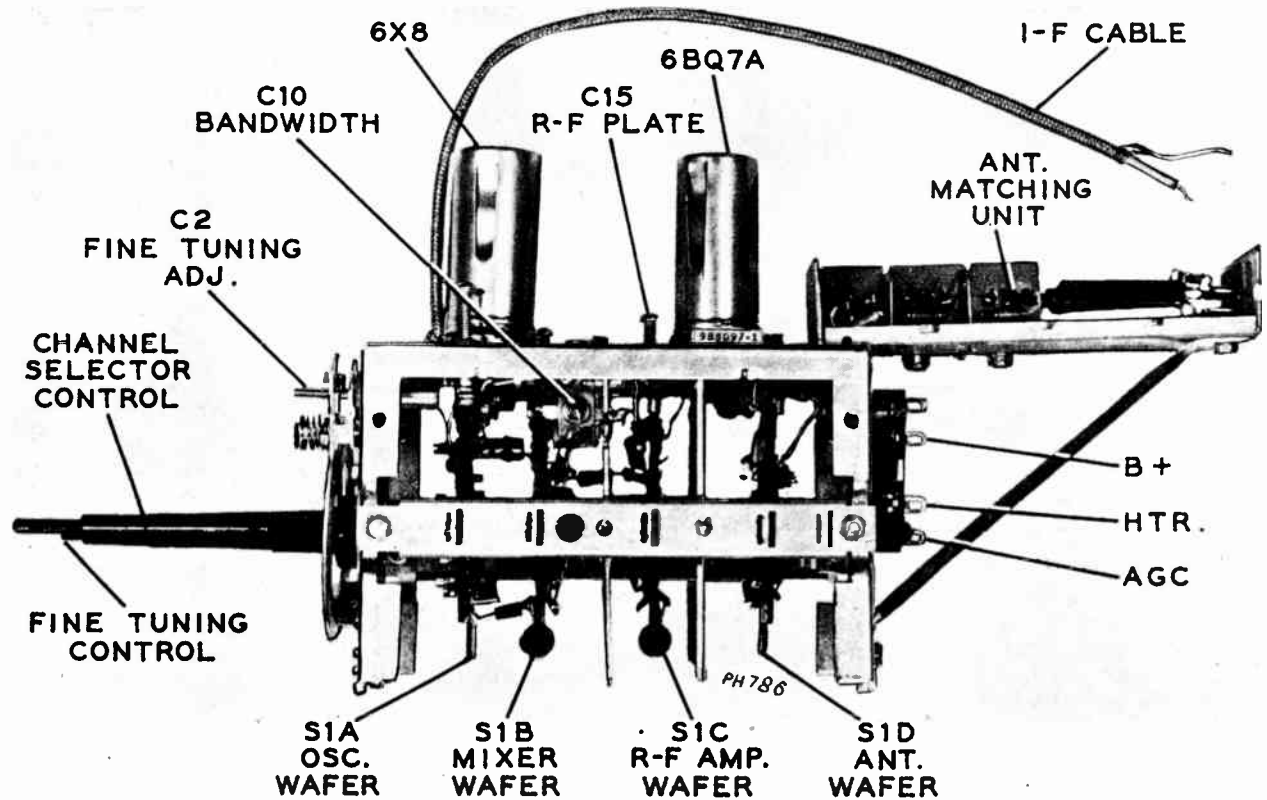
Side View and Wafer Switch Assemblies—KRK-22A Tuner
